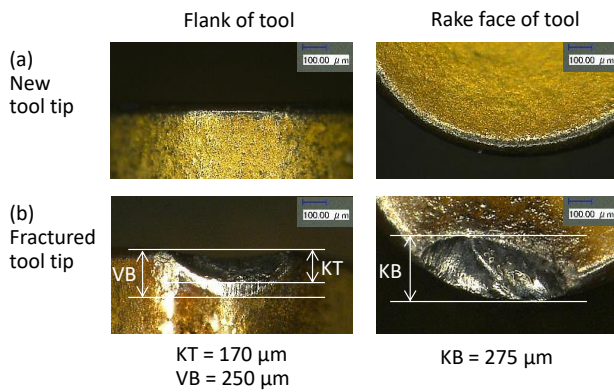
Flank and rake face of (a) new and (b) fractured tool tip.
